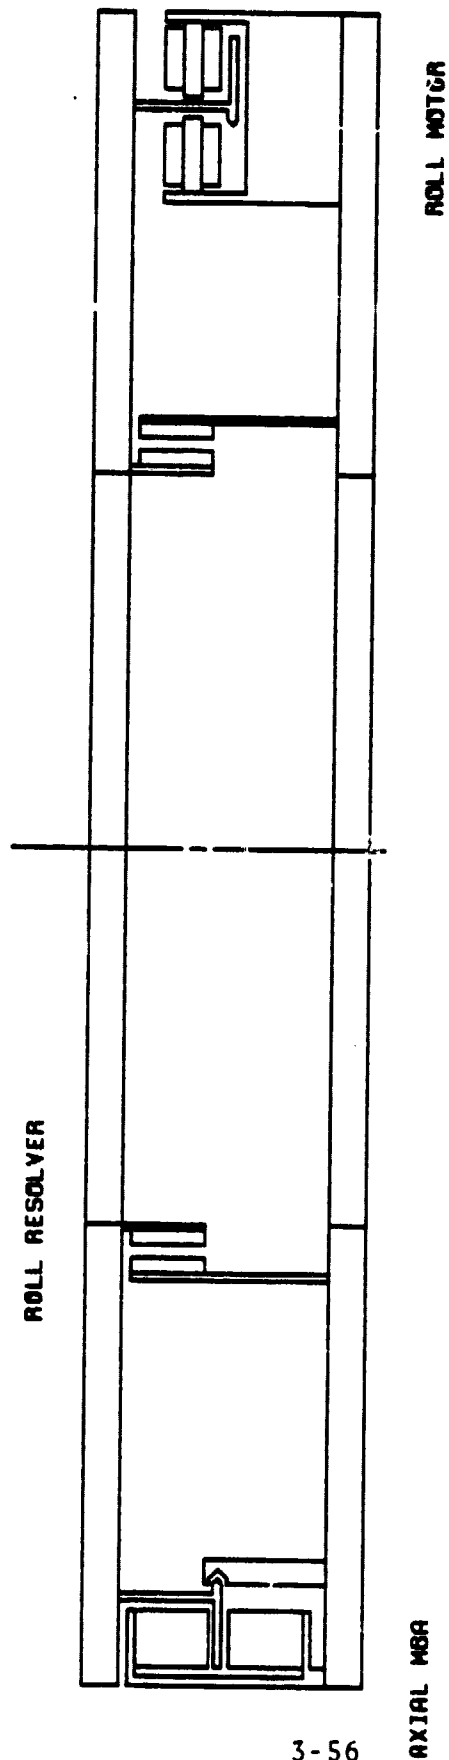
Magnetic Bearing Assembly (MBA)
